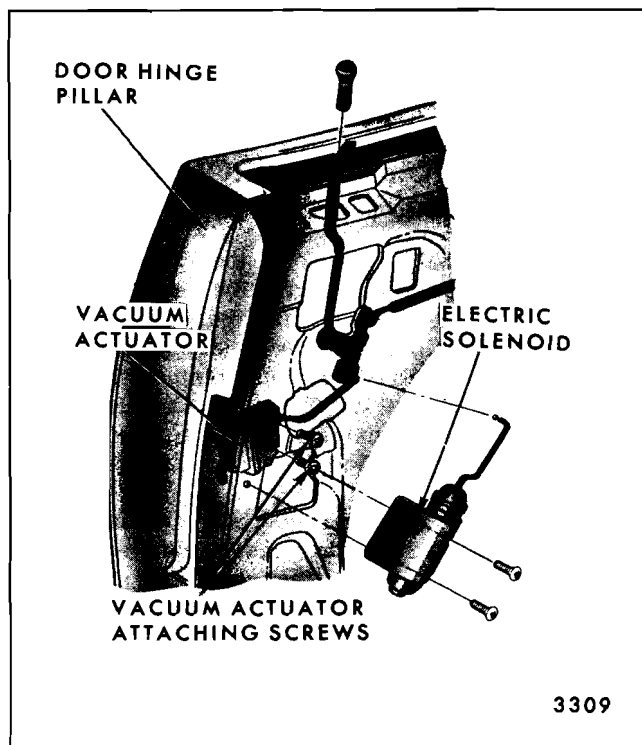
Rear Door Lock Vacuum Actuator or Electric Solenoid Installation
